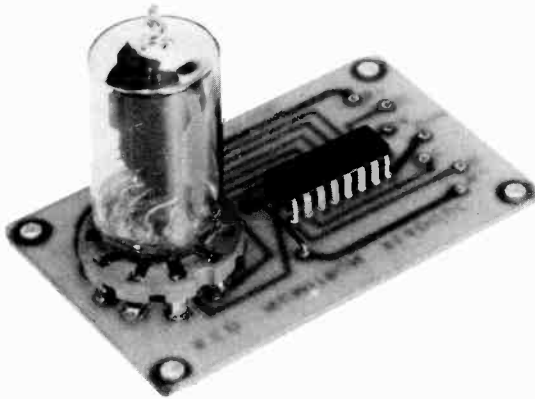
Numitron and decoder/driver mounted on a printed circuit board.
